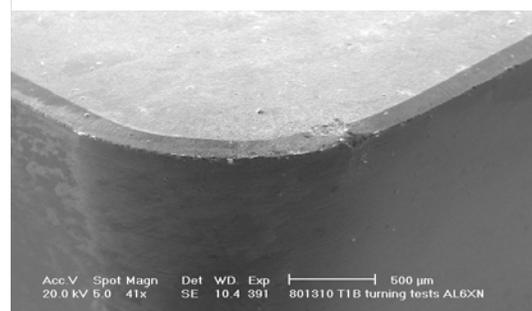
Lathe machining insert wear comparison for different PCBN grades.
